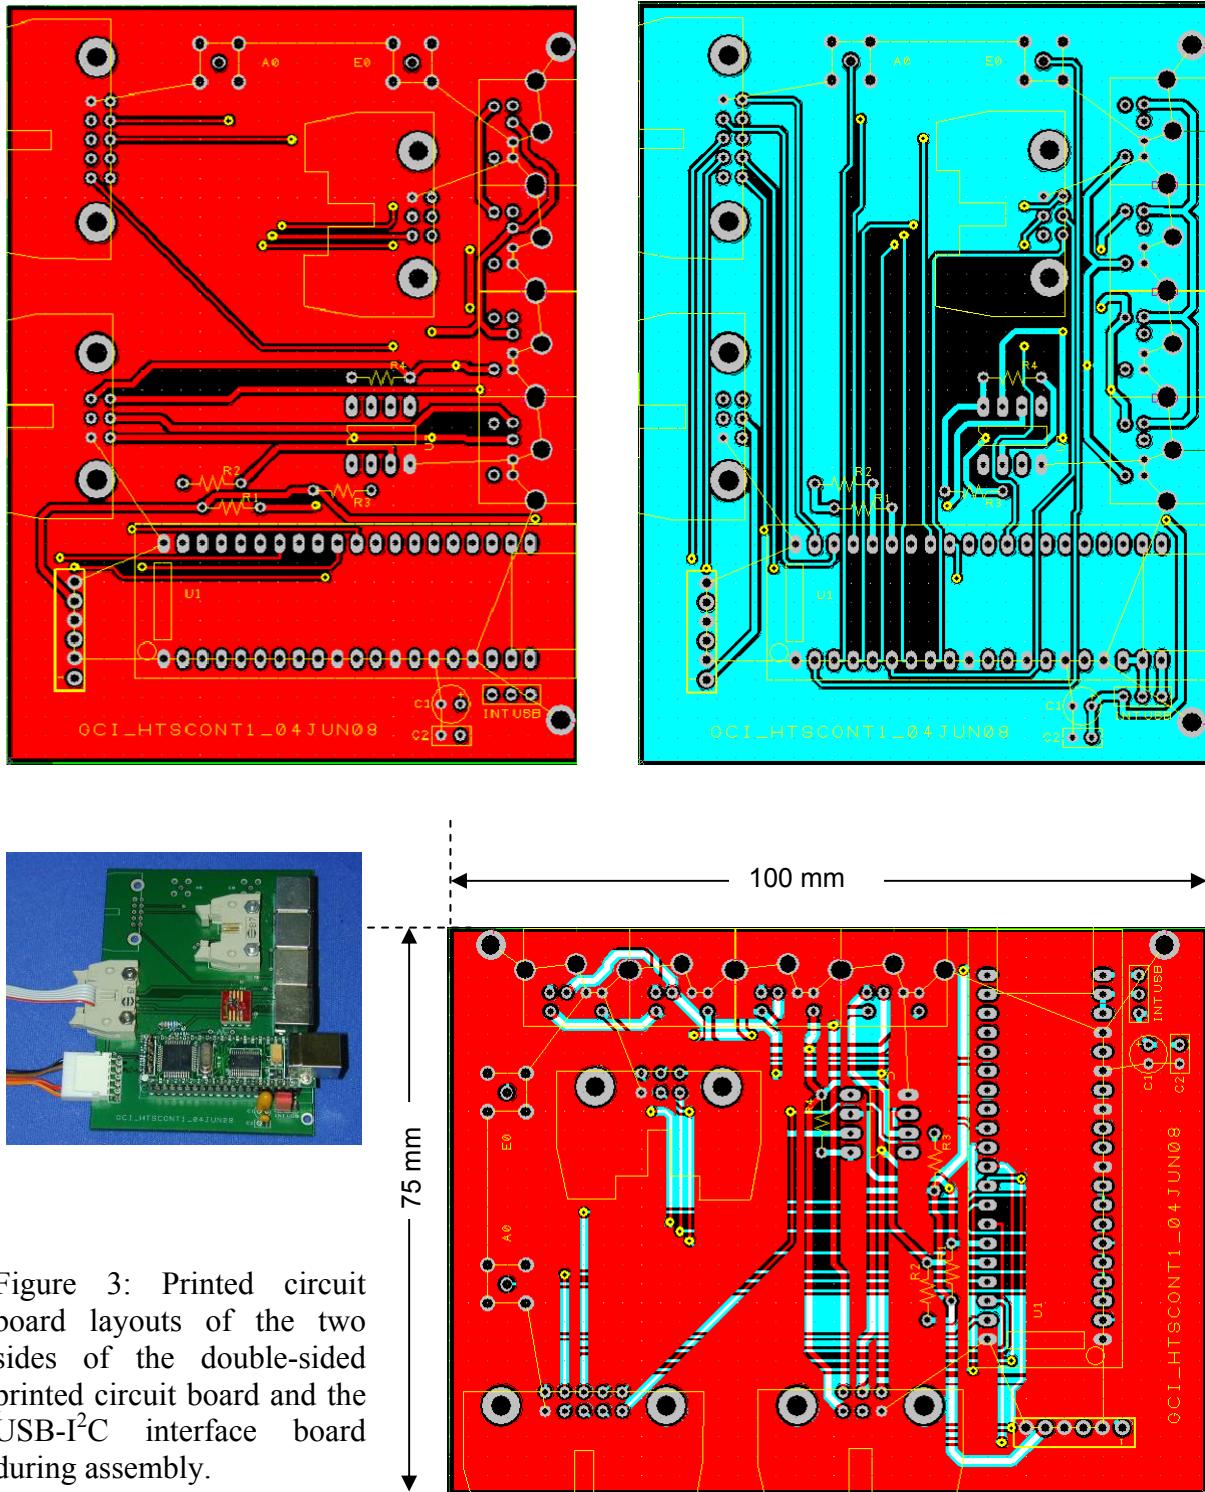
Printed circuit board layouts of the two sides of the double-sided printed circuit board and the USB-I²C interface board during assembly.
